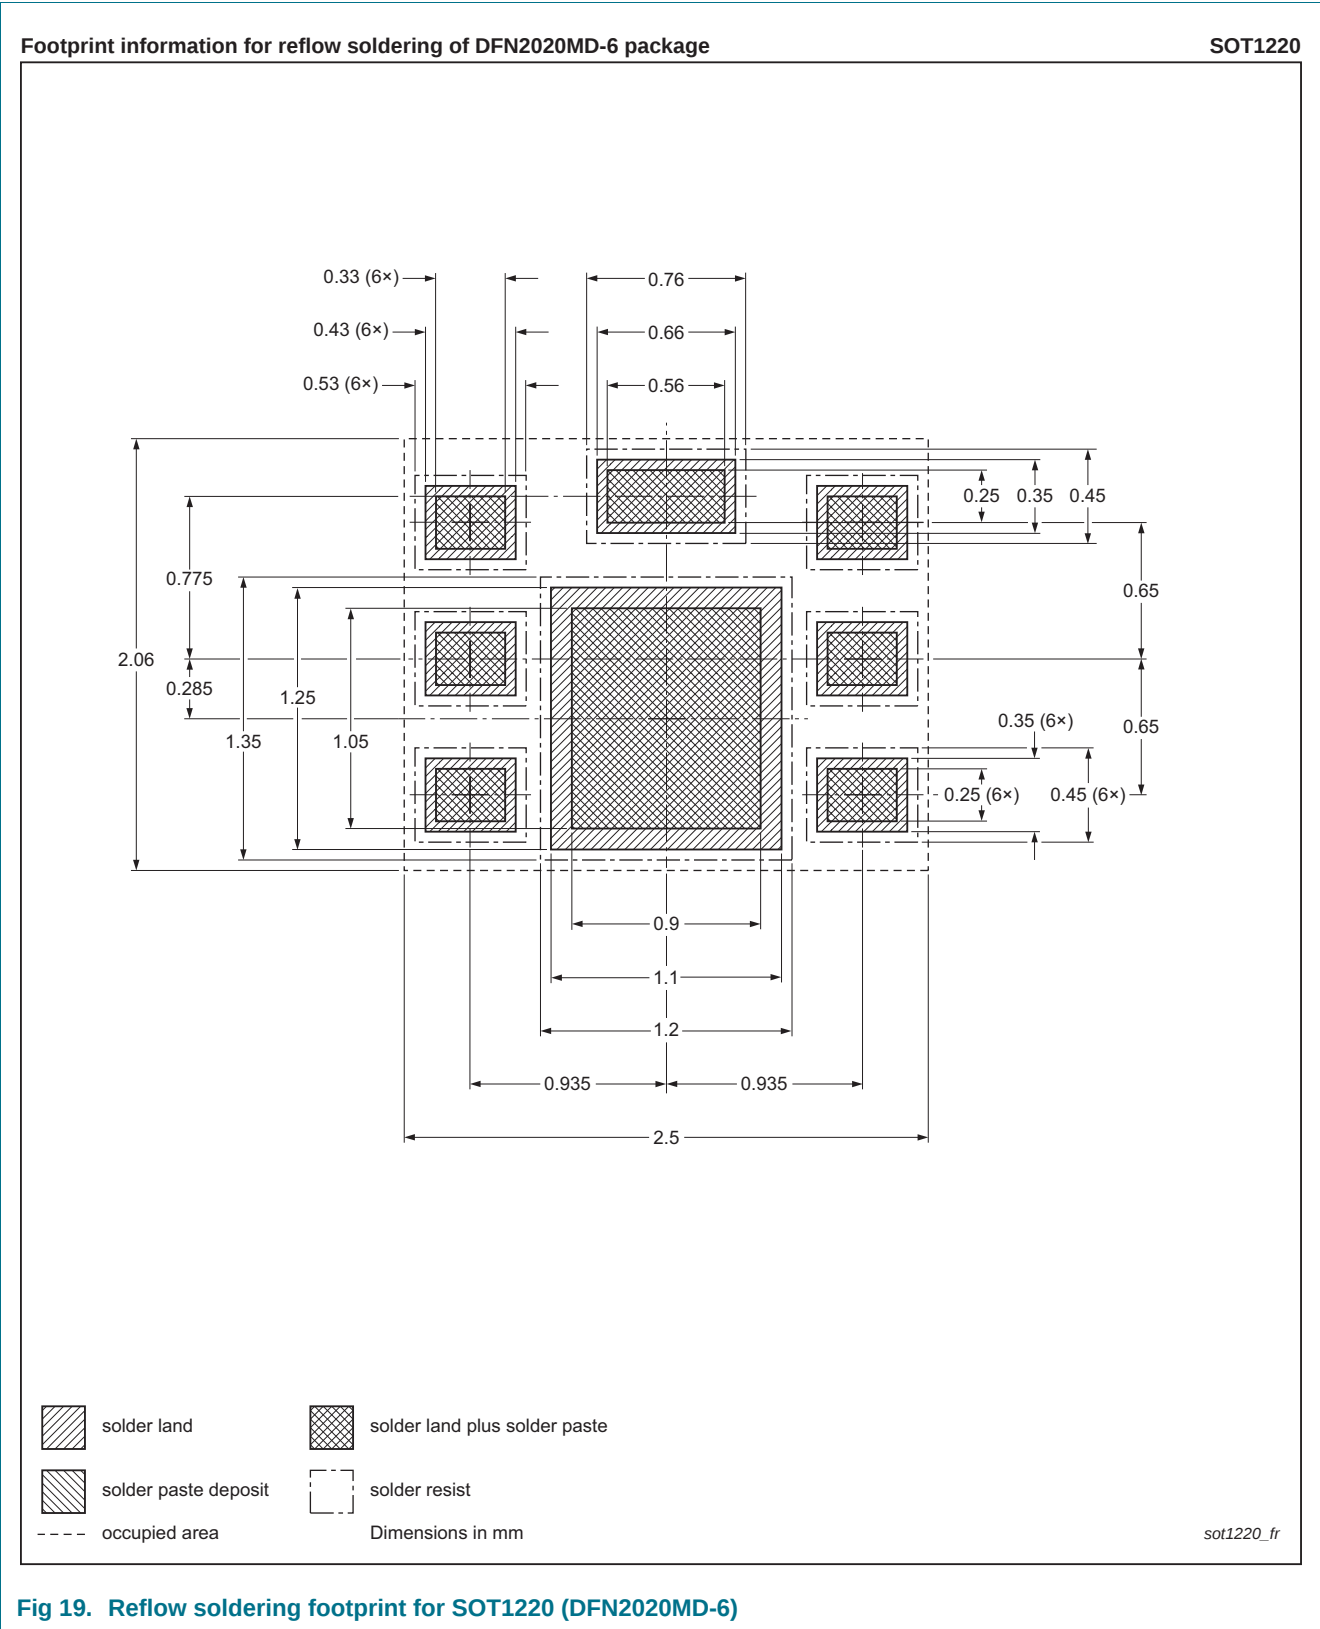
Reflow soldering footprint for SOT1220 (DFN2020MD-6)
